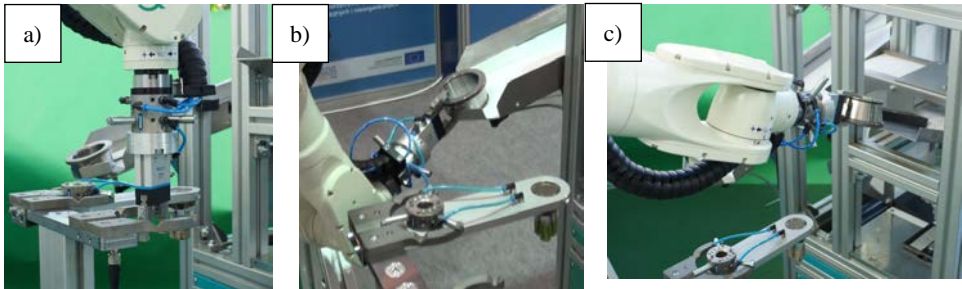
The work cycle of a manipulator handling the stand for detection of inner defects of bearing rings
